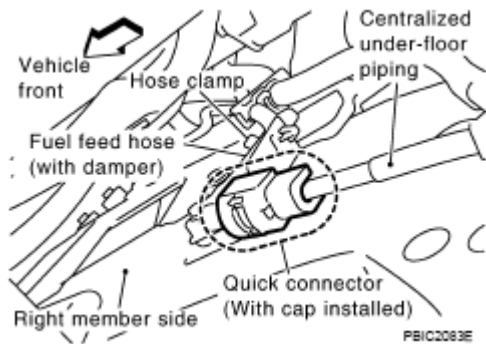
Identifying Fuel Feed Hose (With Damper) From Bracket Hose Clamp
